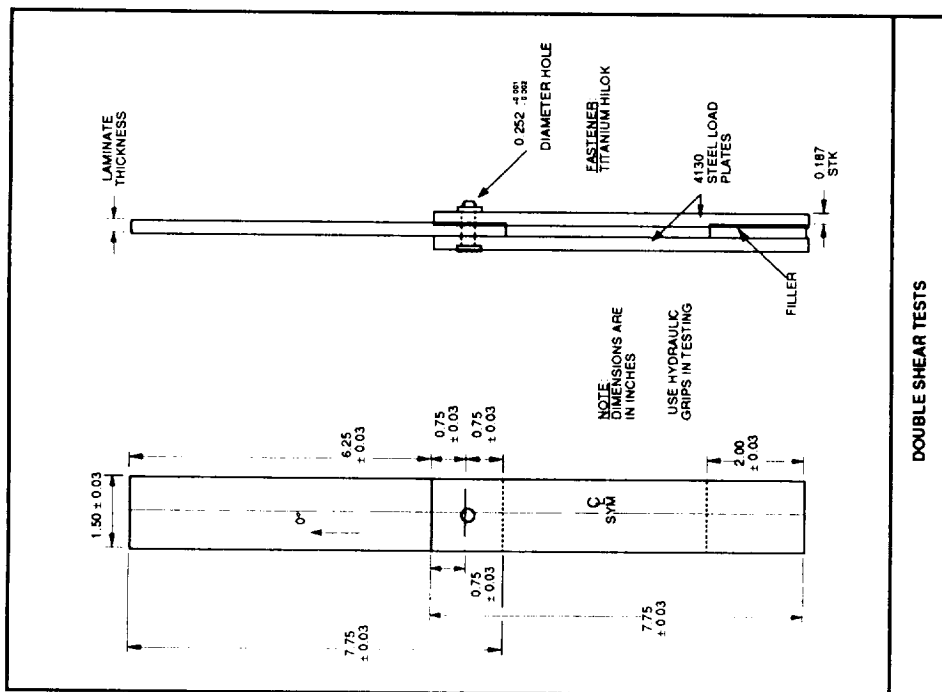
Baseline Dimensions for Double-Shear Specimen.
